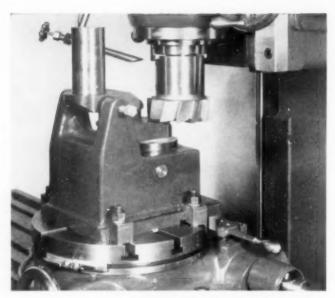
Circular milling attachment and a simple fixture combined for milling the radius on the cheeks of a single throw crankshaft.
